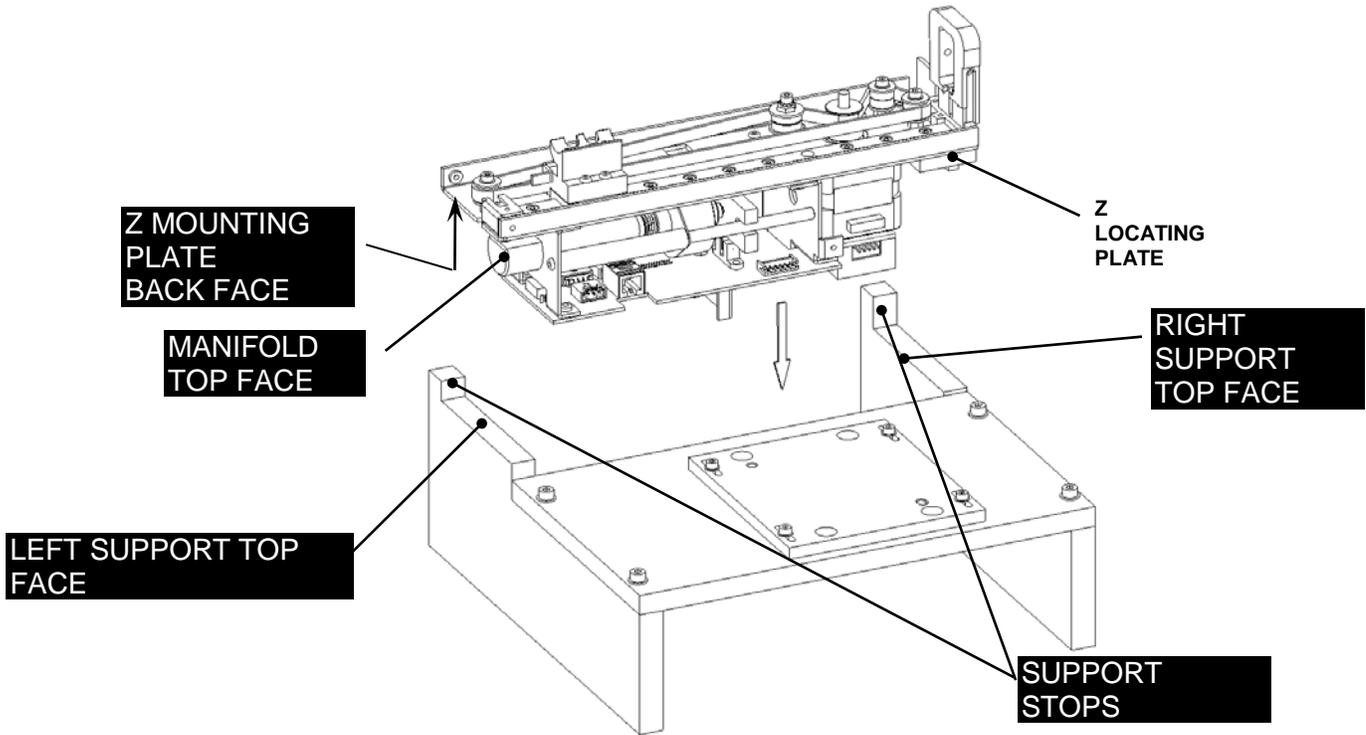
Mounting Drive Assembly on Belt Tensioning Fixture
